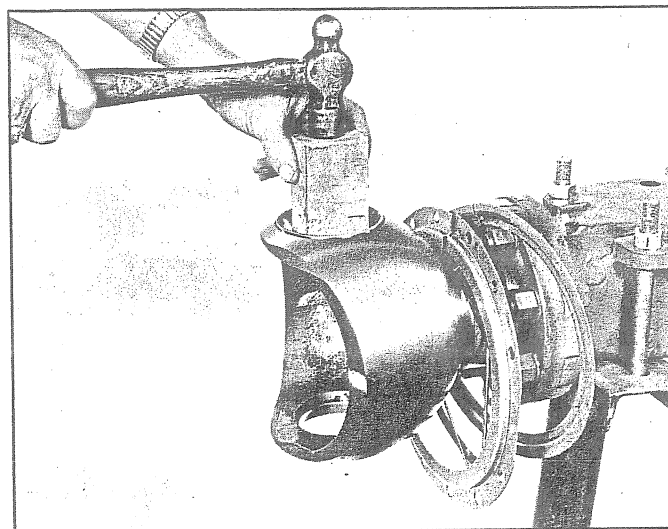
Removing Trunnion Bearing Oil Retainer
